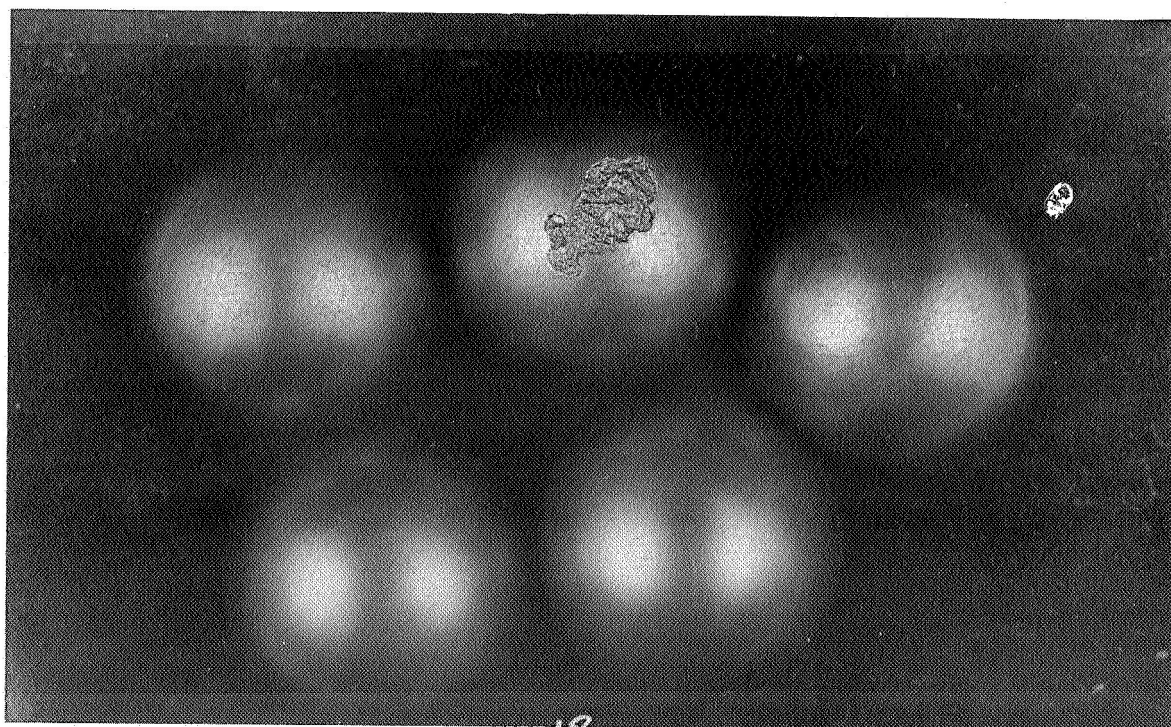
BALL FATIGUE FAILURE - BEARING S/N 18
